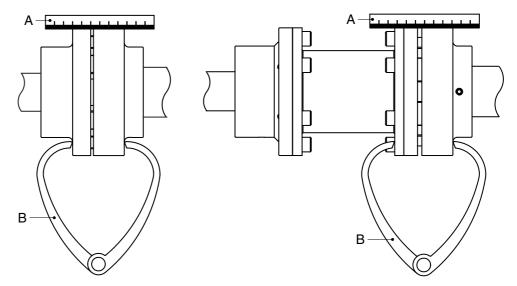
Aligning the coupling by means of a ruler and a pair of outside calipers.
